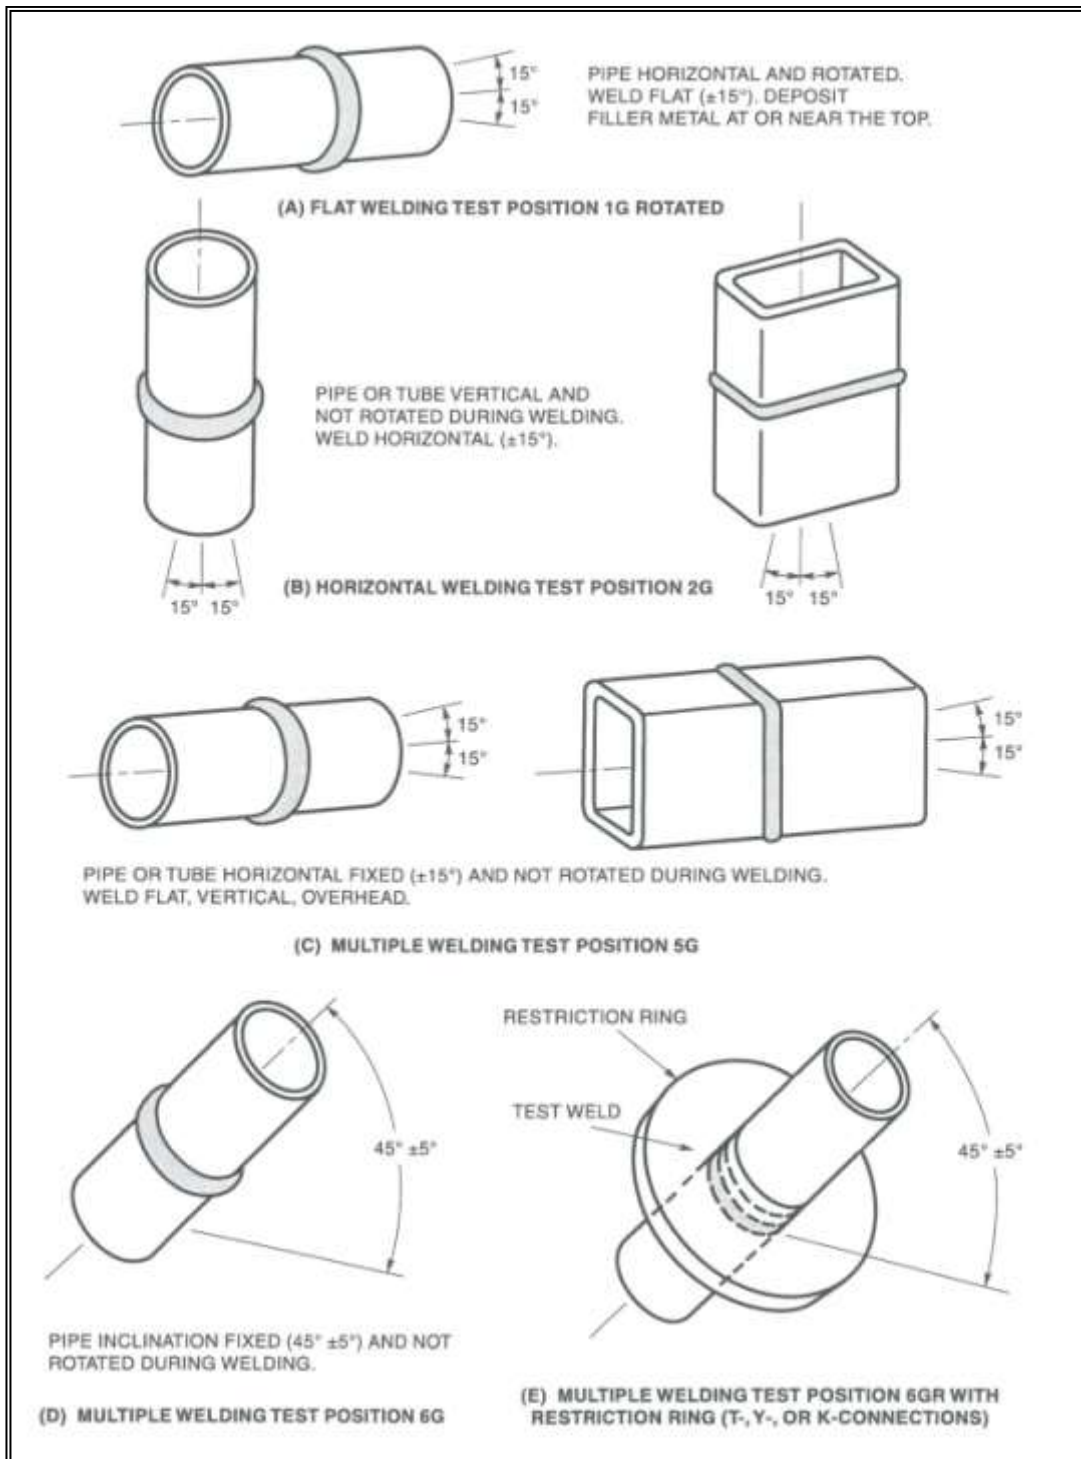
Positions of qualification test pipes/tubes for groove welds
